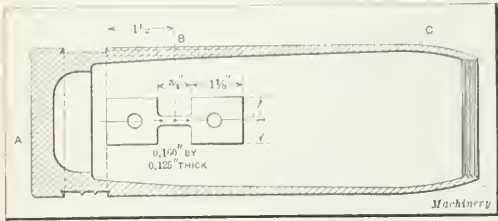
Cross-sectional View of Shrapnel Shell showing Points A, B and C where Tests are made, and one of the Tensile Test Samples
